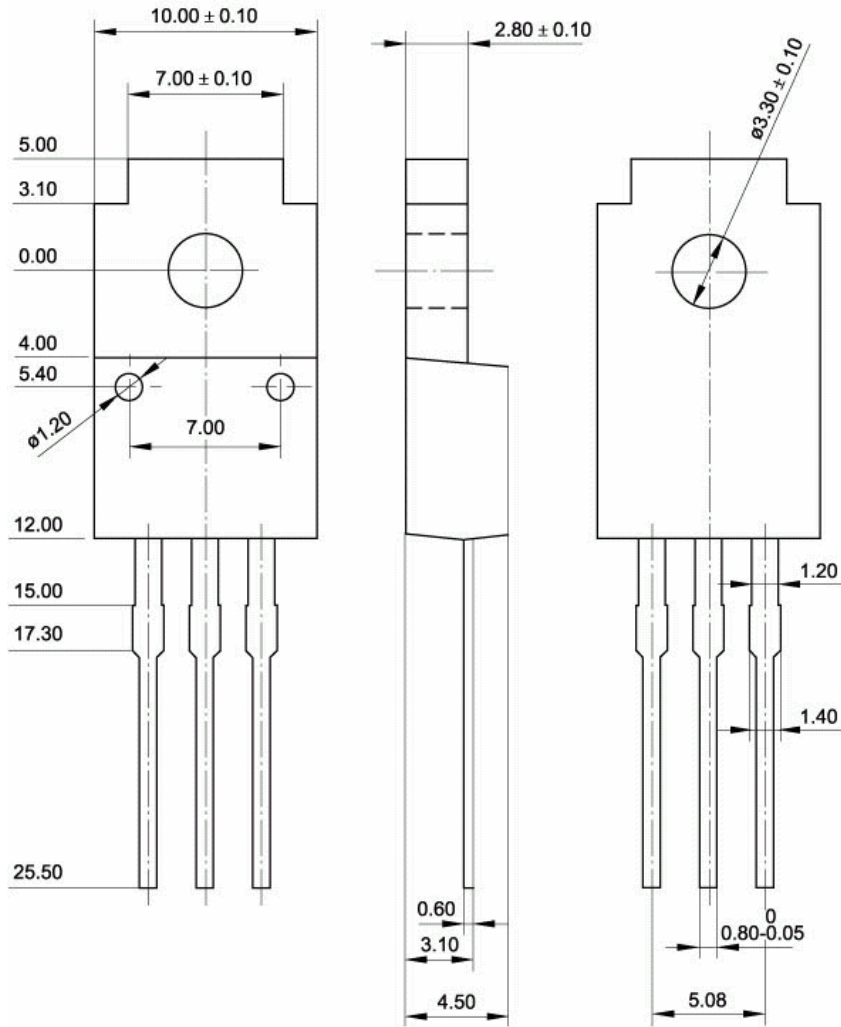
Outline dimensions (unindicated tolerance:  $\pm 0.15$  mm)
